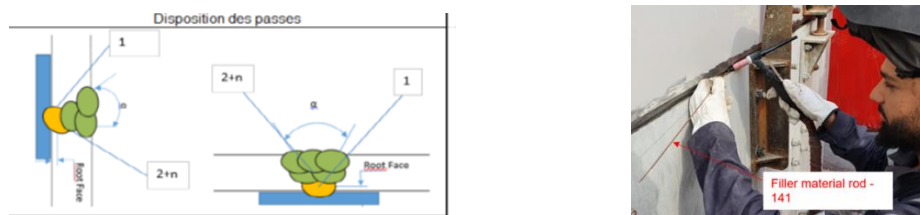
Butt weld for APC and pool modules connection (left) – TIG welding at the root (right)
